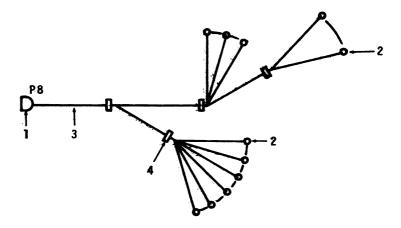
Relay control box assembly to control cubicle assembly and exciter and regulator (Sheet 2 of 2).
